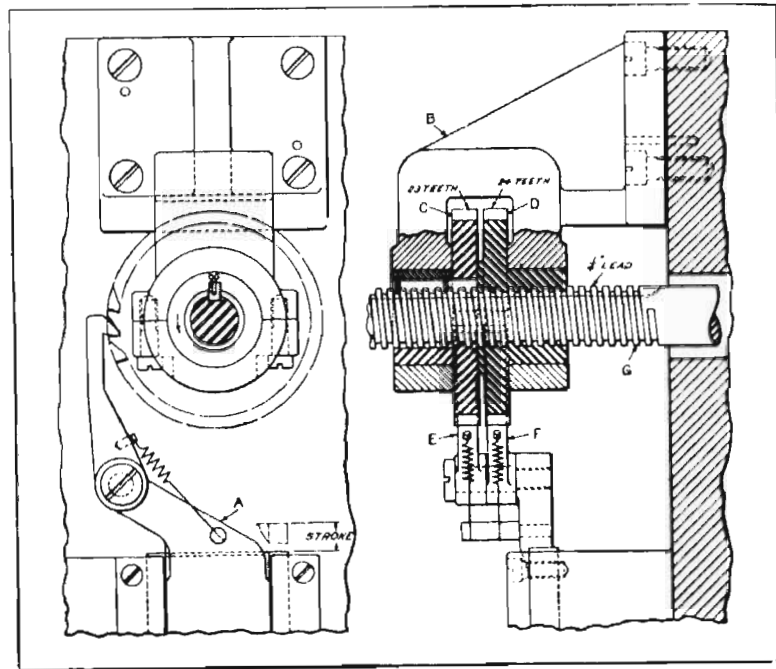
Ratchet Mechanism for Imparting Slow Movement to Feed-screw
